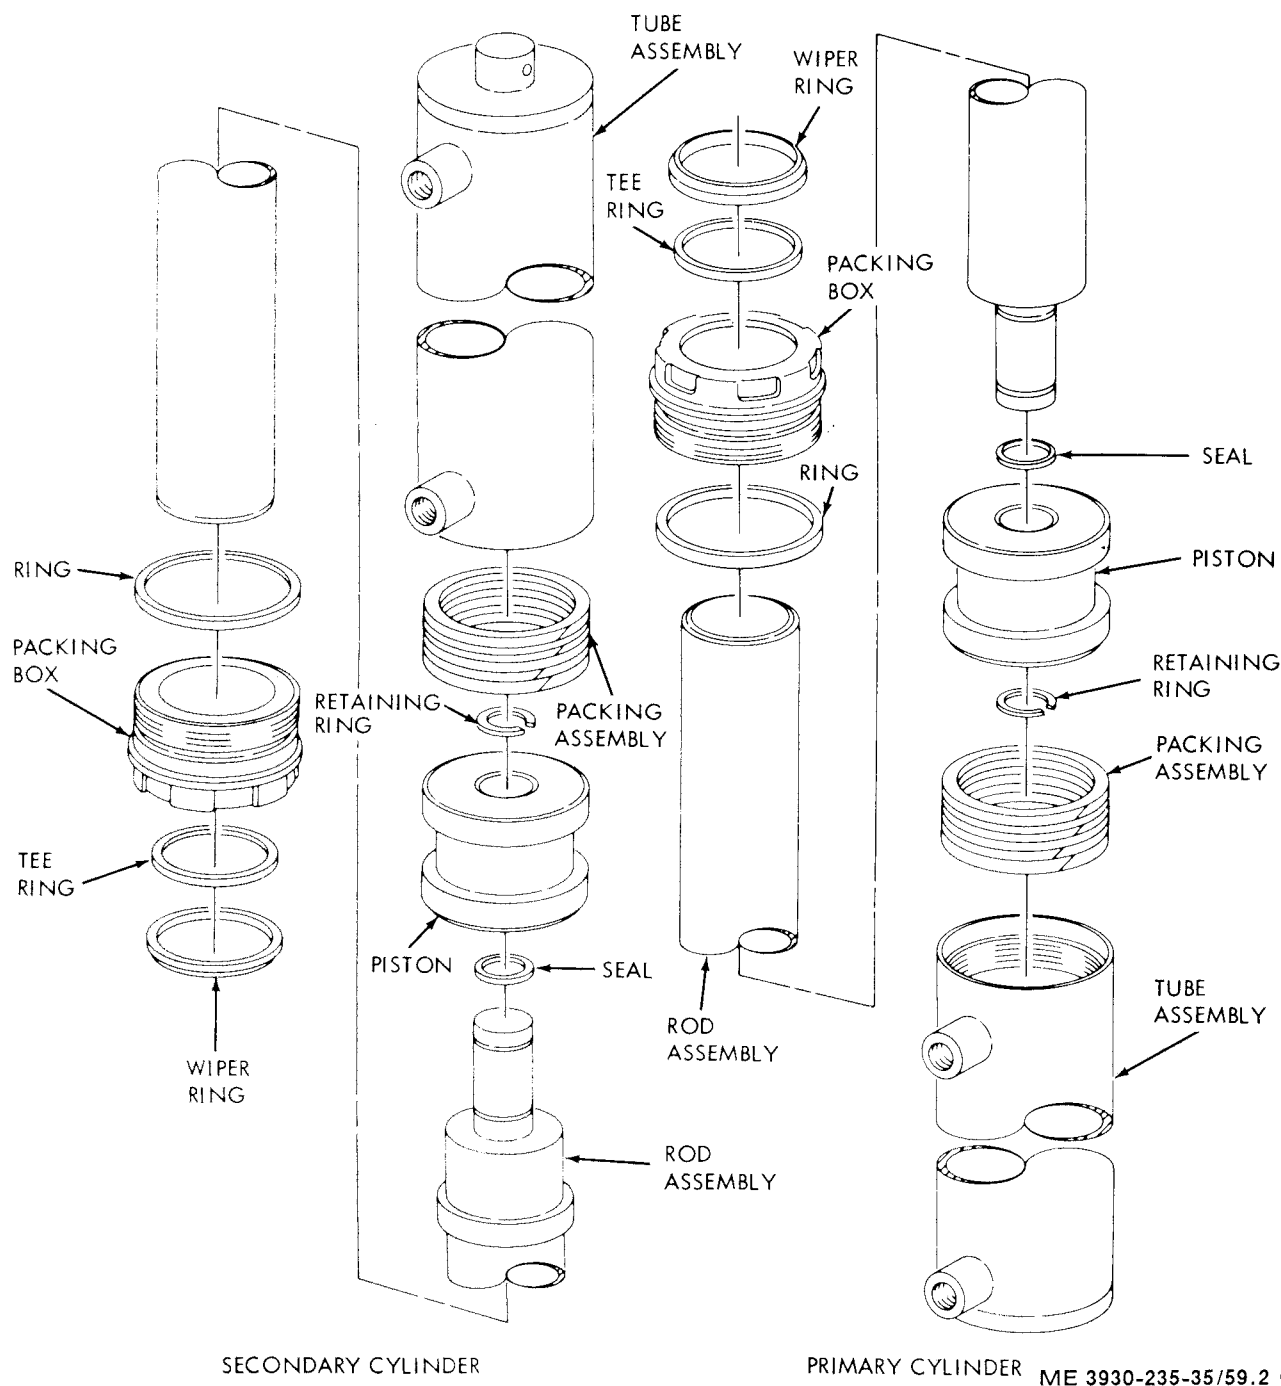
Lift cylinders, exploded view (MHE-220).
